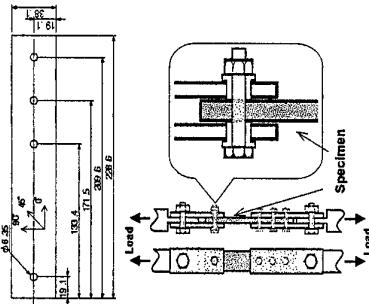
Specimen configuration and bolt-loading apparatus, dimensions in mm.
